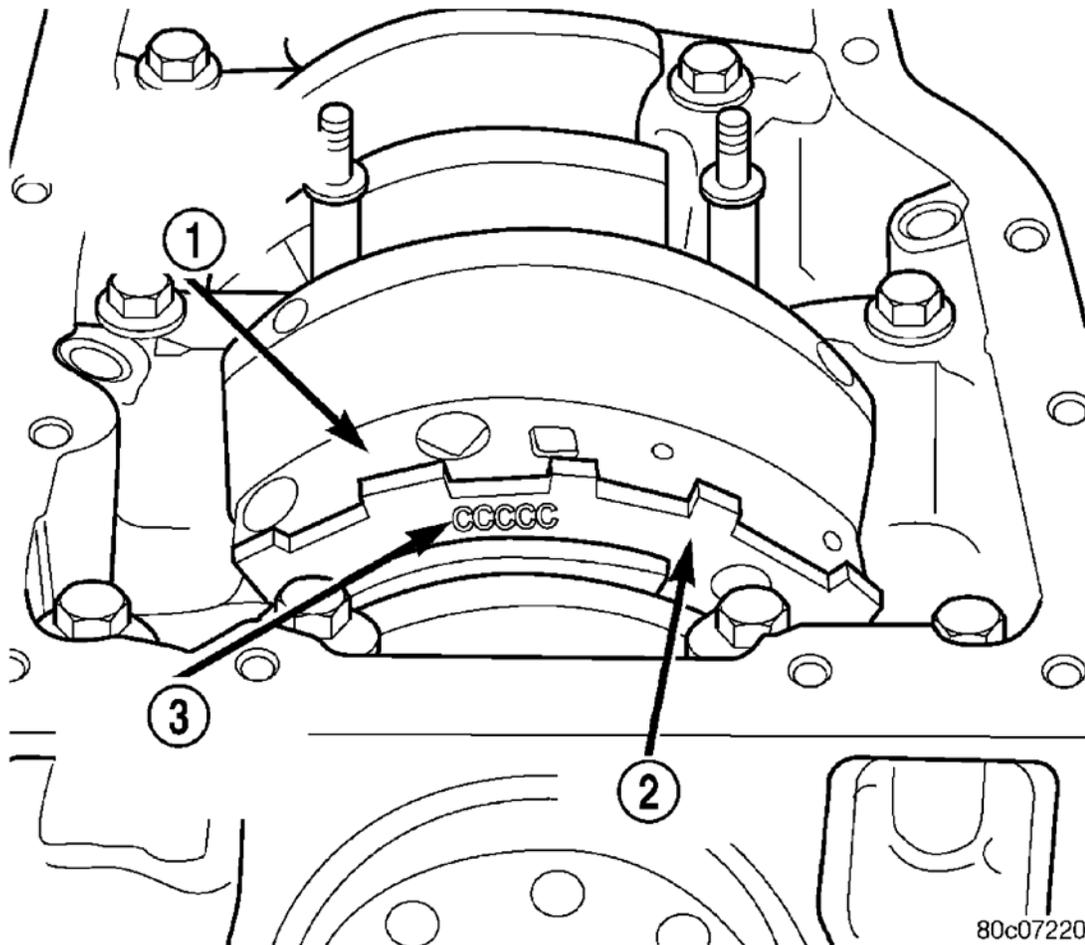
Rearmost Crankshaft Counter Weight, Target Wheel & Main Bearing Select Fit Markings
